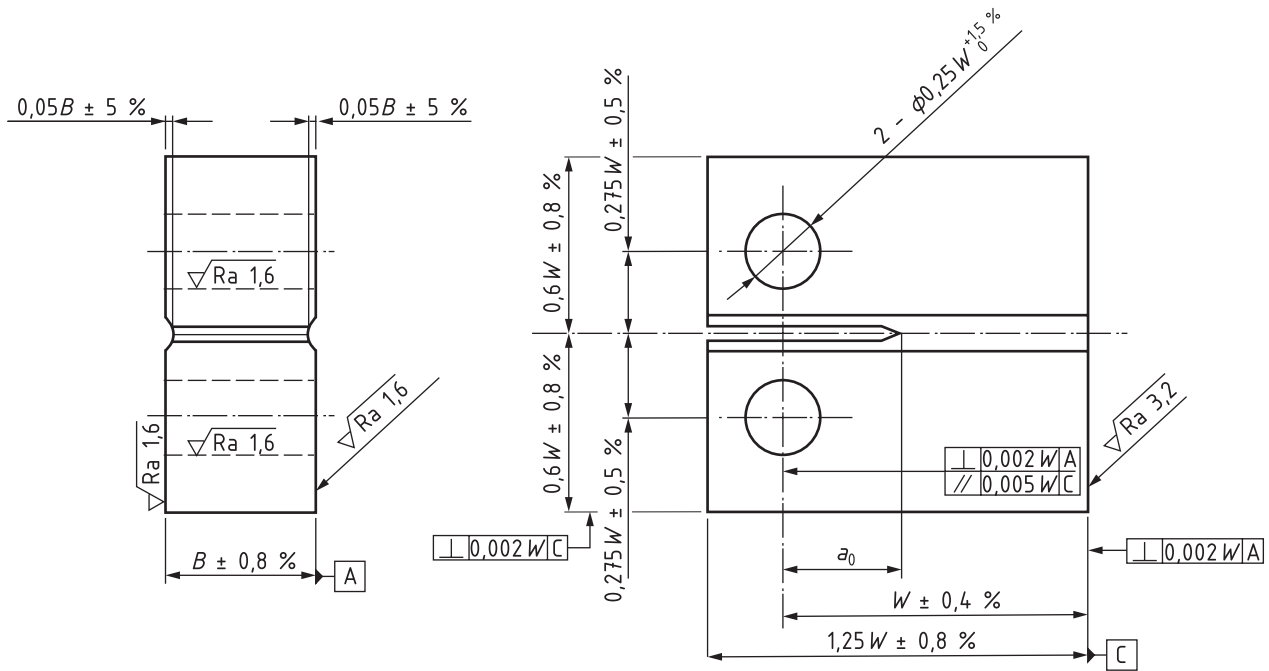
Typical dimensions and tolerances of a CT specimen
